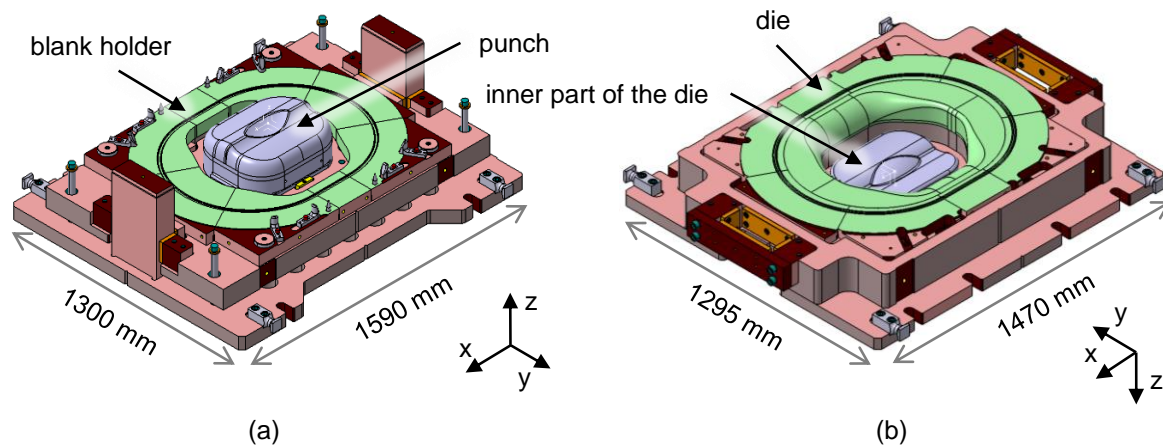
Lower part (a) and upper part (b) of the deep drawing tool
